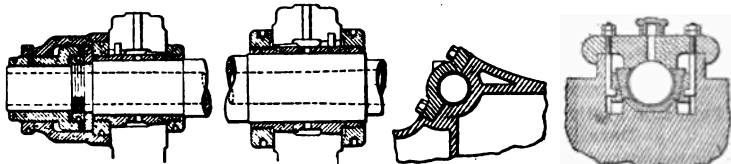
Lathe Headstock Bearings. FIGS. 97 and 98.—Engine Bearings.
